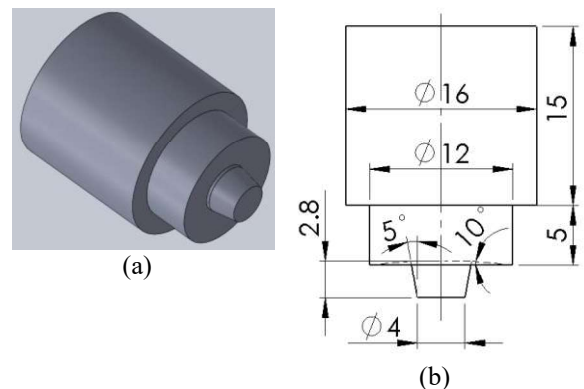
The FSSW tool (a) 3D view and (b) projected view (Dimensions in mm).
